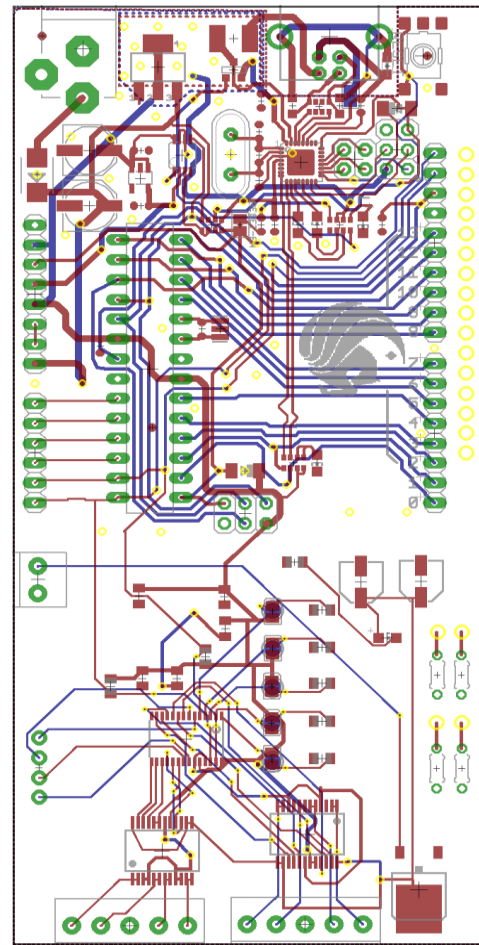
Universal Circuit Fabricator Custom Printed Circuit Board layout
